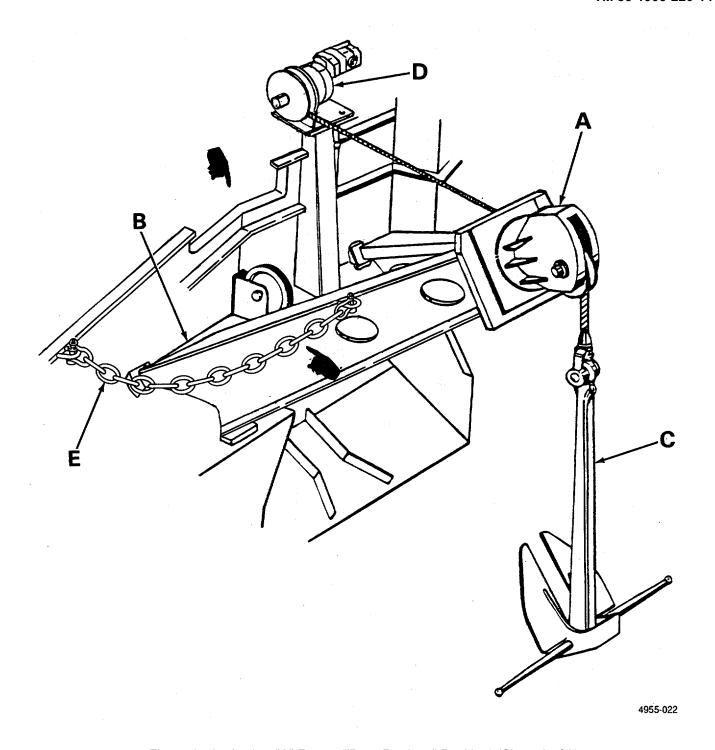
Anchor "A" Frame ("Drop Retrieve" Position) (Sheet 2 of 3)
